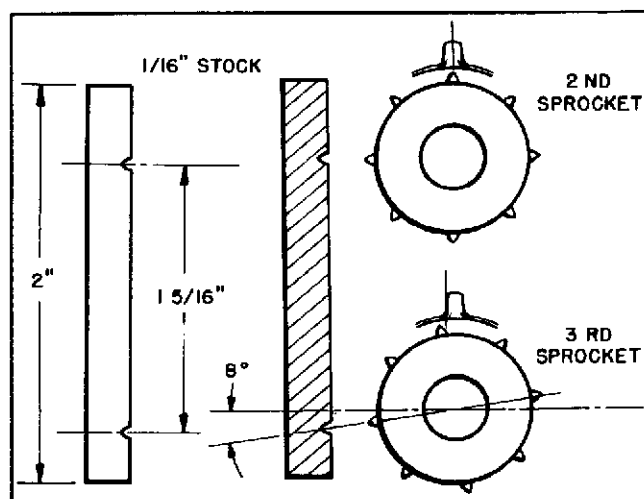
Figure T. Improved Tool for Obtaining Proper Sprocket Synchronization
